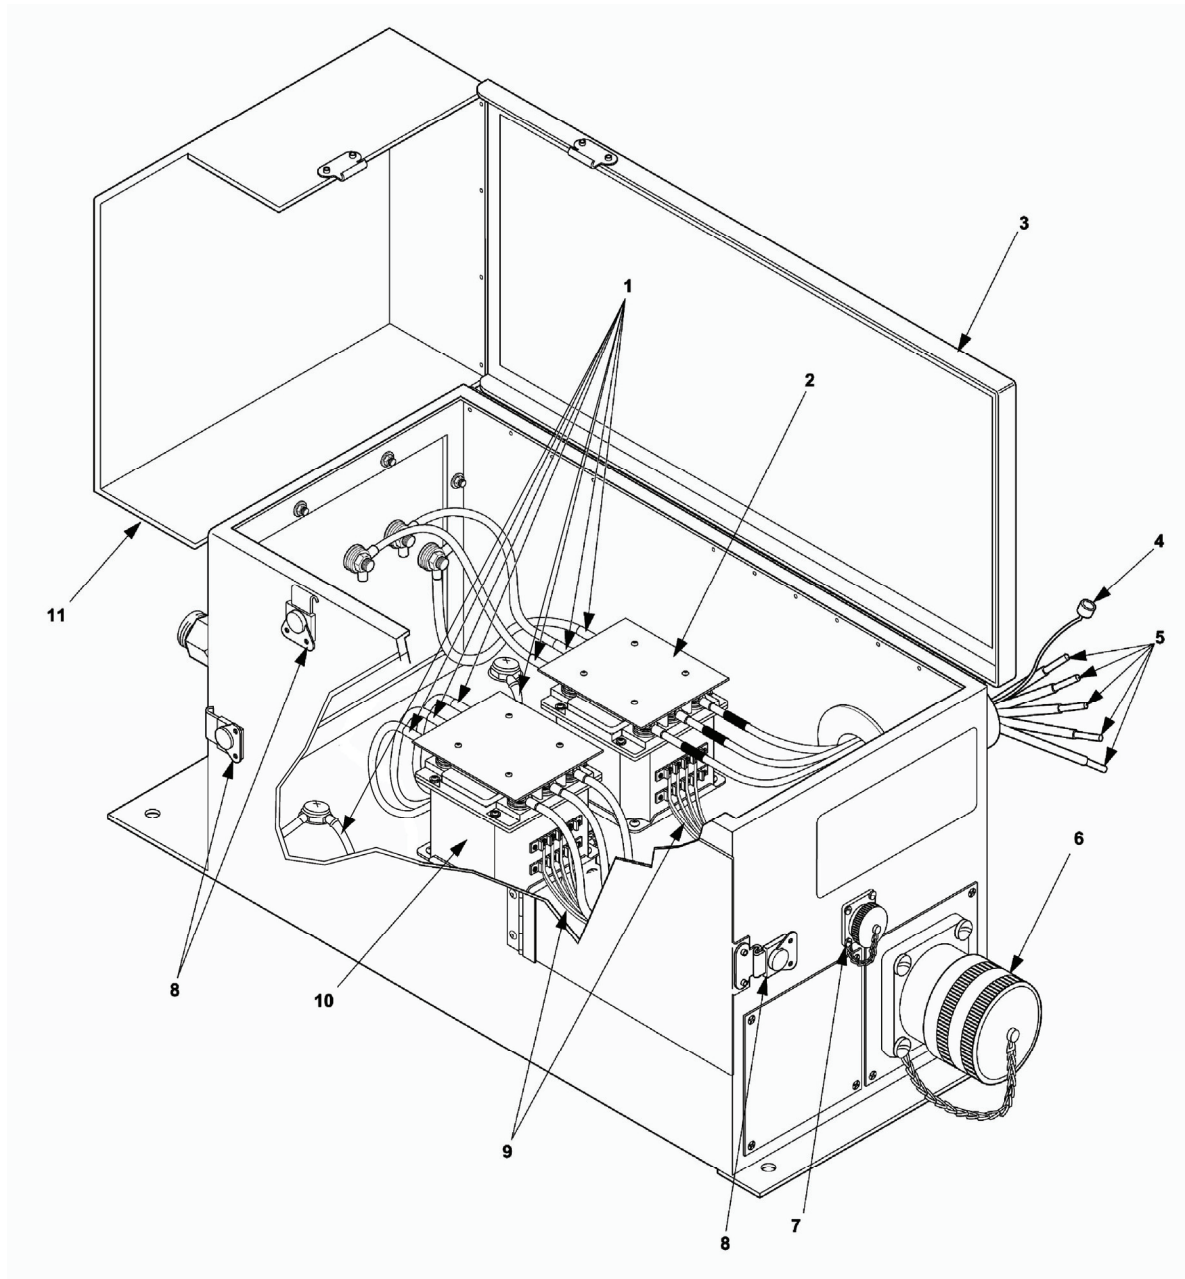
Switch Box Assembly Test (B&C Models).
